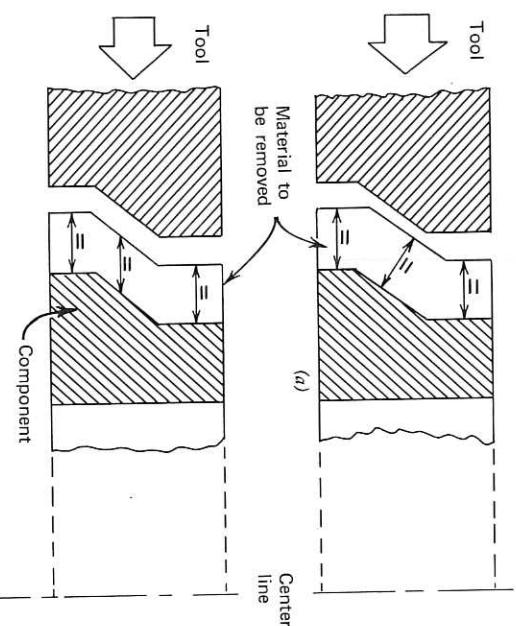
Material shape. (a) Forging is a uniform envelope of the work and therefore does not conform to tool shape. (b) Forging has a uniform radial allowance and thus does conform to the tool shape.
